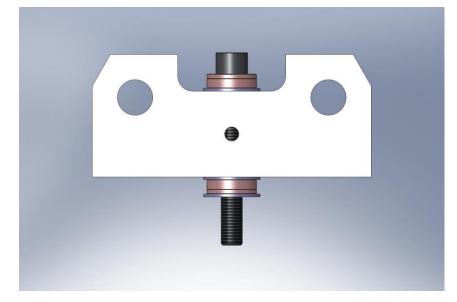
Actuator U-Bracket, with screw and washers (refer to Figure 4.31 for more detail). Two of these mount to Coil Support on Vertical Actuator. Spherical washers and loose thru holes compensate for machining and assembly tolerances, when Actuators are installed in HAM ISI.
